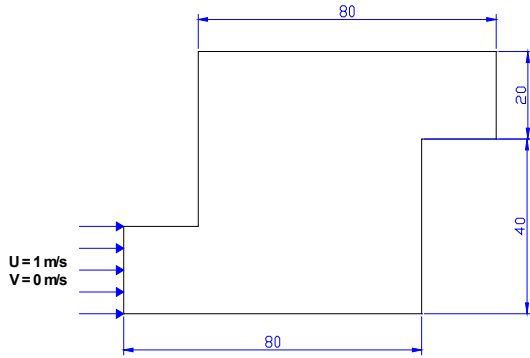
Mold Cavity dimensions (mm) with boundary conditions
